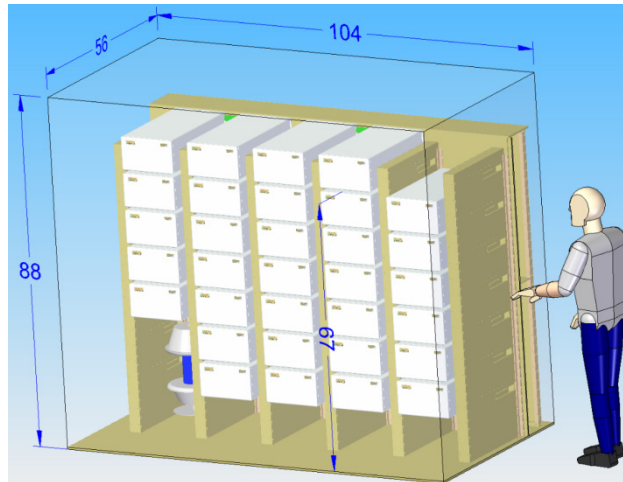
Preliminary sketch of the overall modulator layout. Dimensions are in inches.
